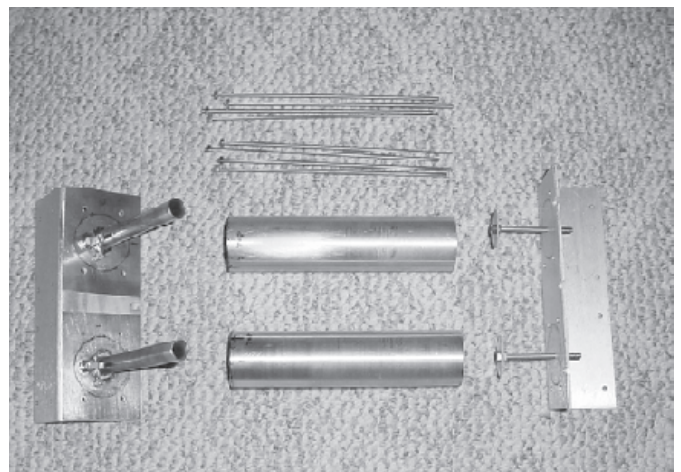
Photo F — The copper pipe assembly, aluminum tube "cans" and all thread rods are laid out ready for assembly. The bandpass adjustment capacitors have been installed in holes in the second aluminum angle bracket.
